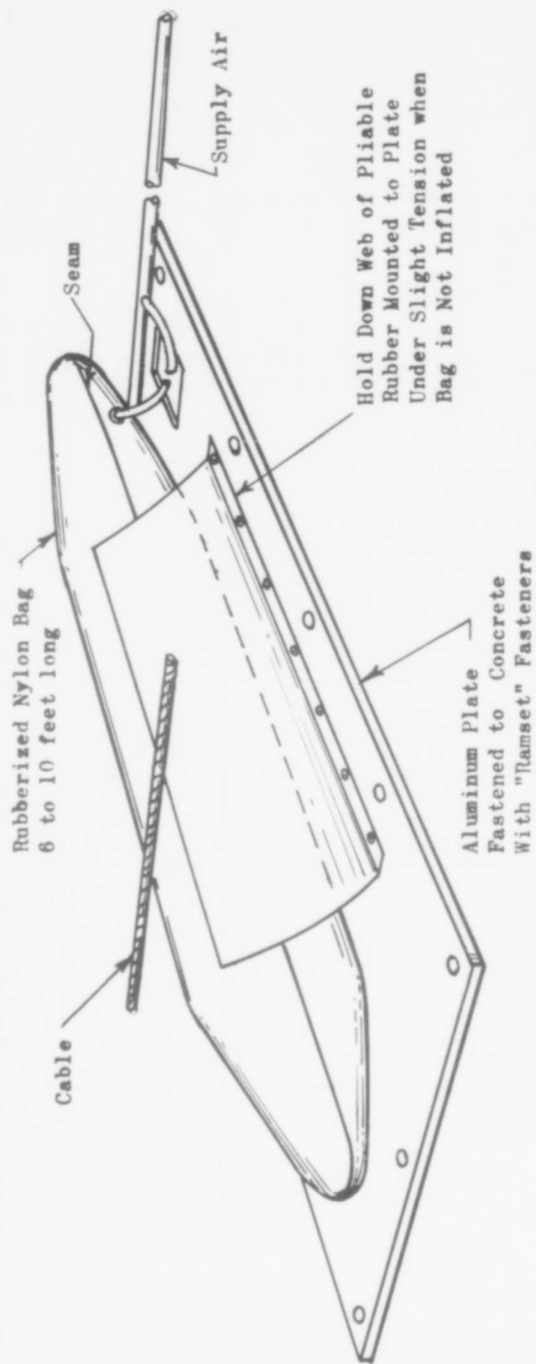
INFLATABLE CABLE SUPPORT - DESIGN I
